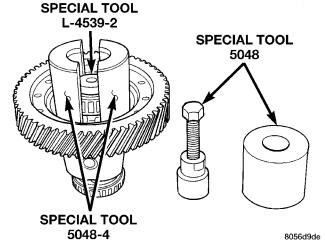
Position Button and Collets Onto Differential and Bearing (Ring Gear Side)
